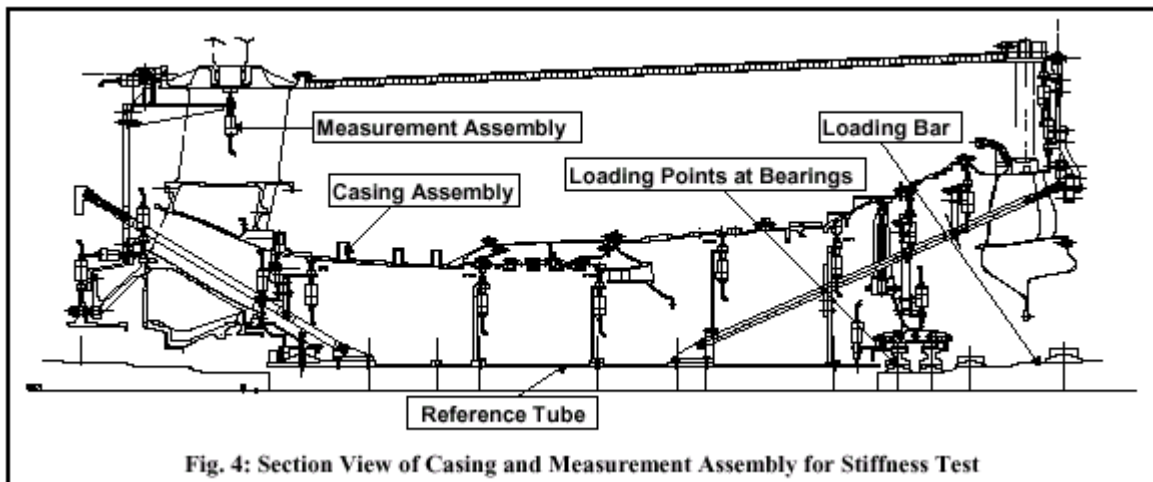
Section View of Casing and Measurement Assembly for Stiffness Test
